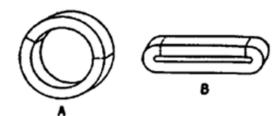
Location of Transverse Tension Test Specimen in Ring Cut from Tubular Steel Products
